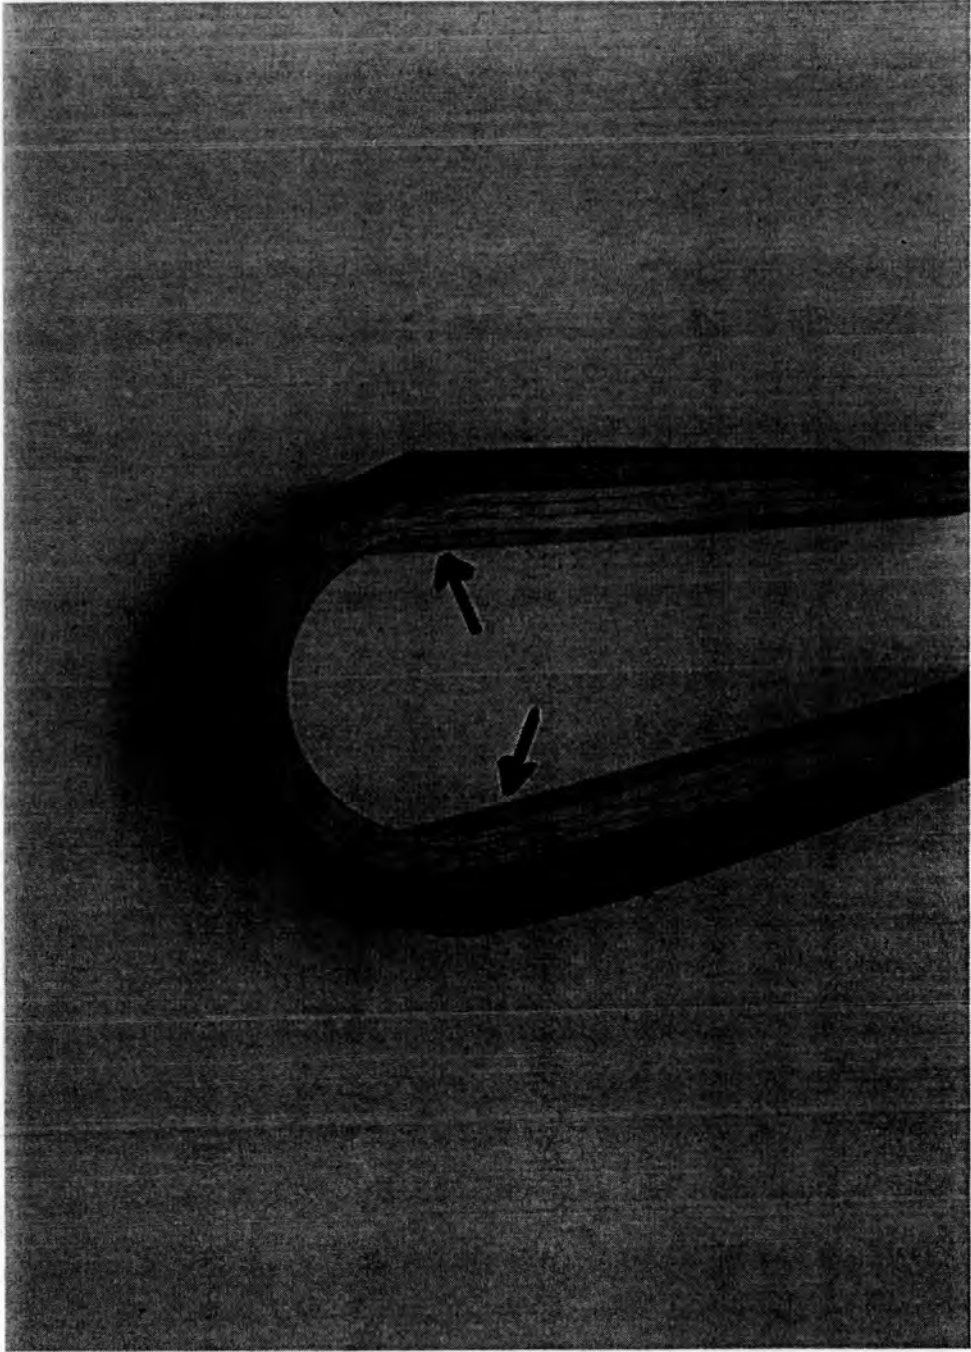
Cross Section of Root Manufactured via Lay-Up Station (Trial II)
